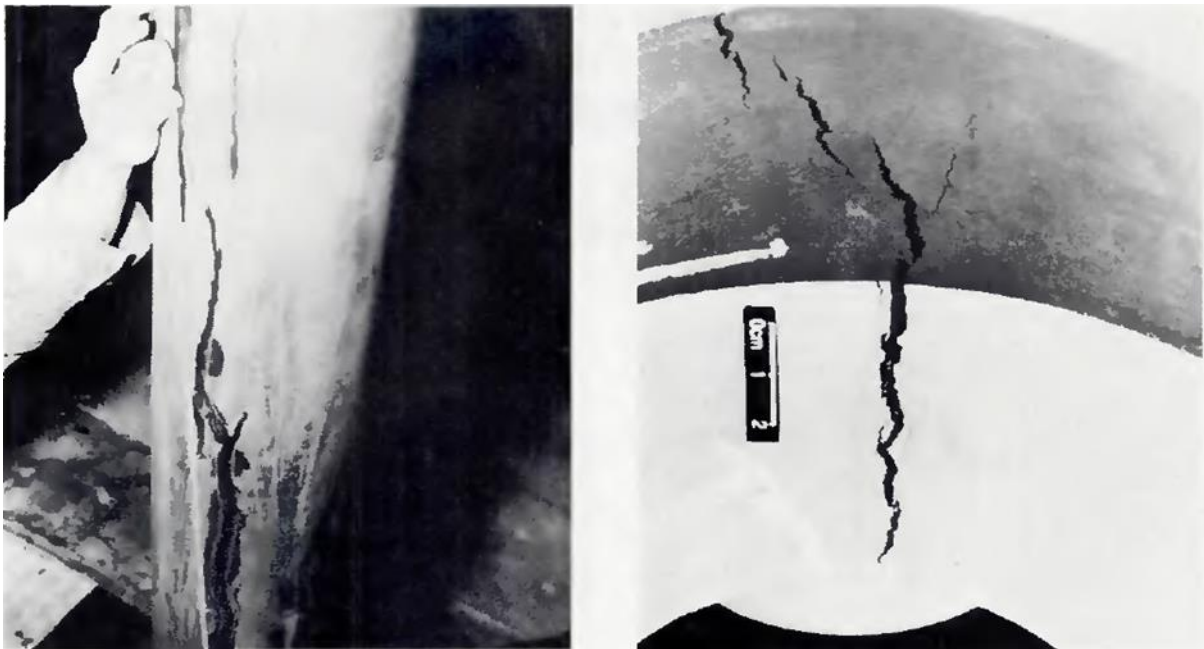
Near through wall longitudinal cracks in 316 Stainless steel main steam pipe (Eddystone power plant) [15].
